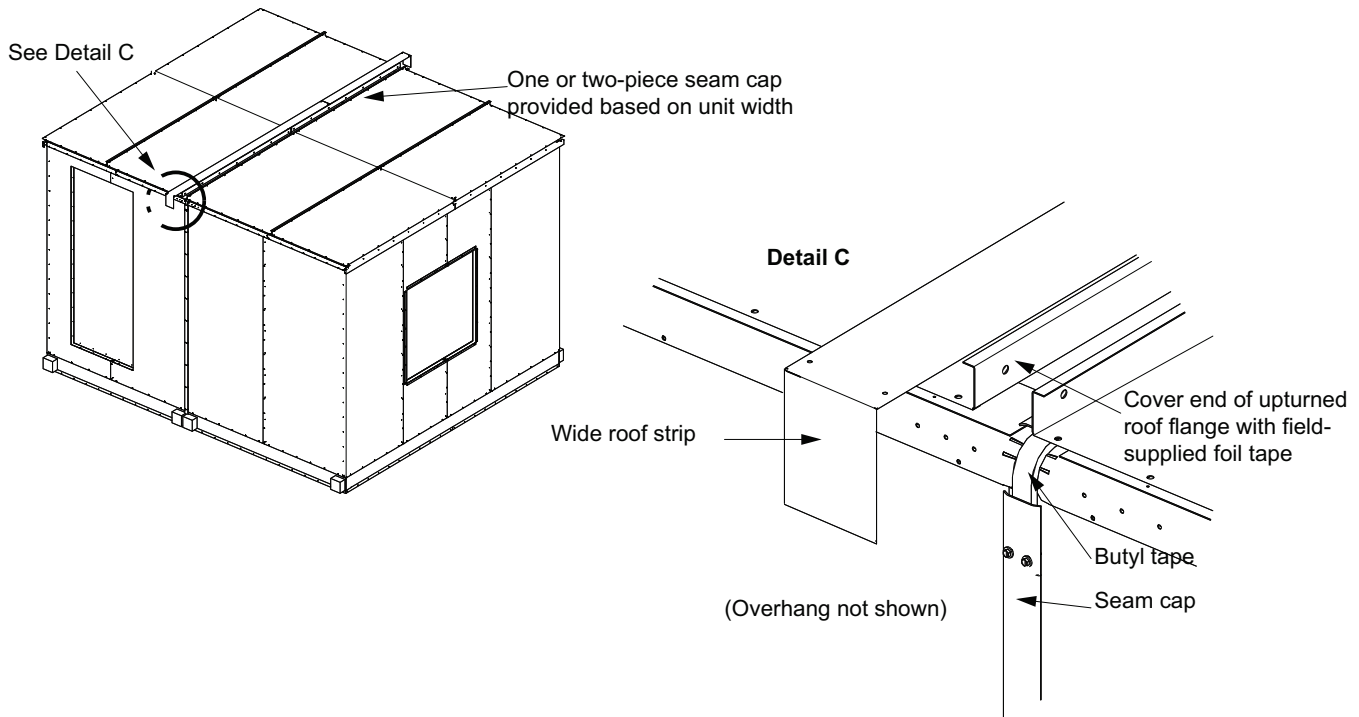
Section-to-section seam cap installation (internal widths 102 to 168 in.)
